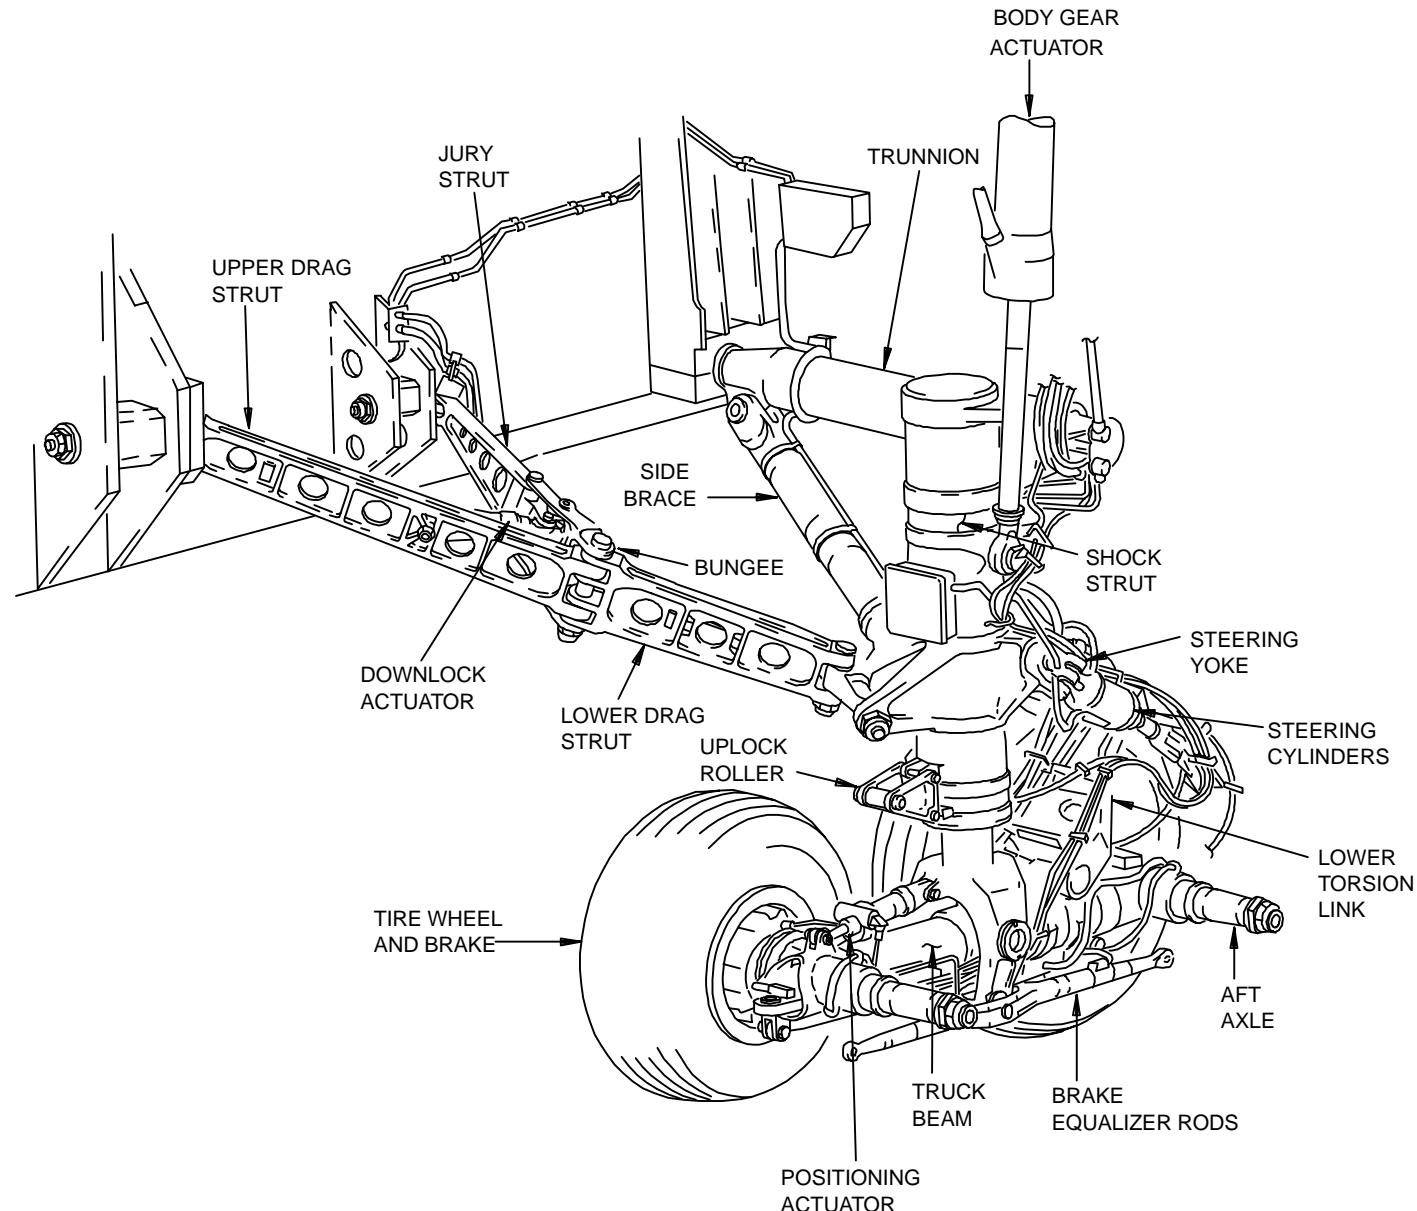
BODY GEAR GENERAL COMPONENTS OVERVIEW
